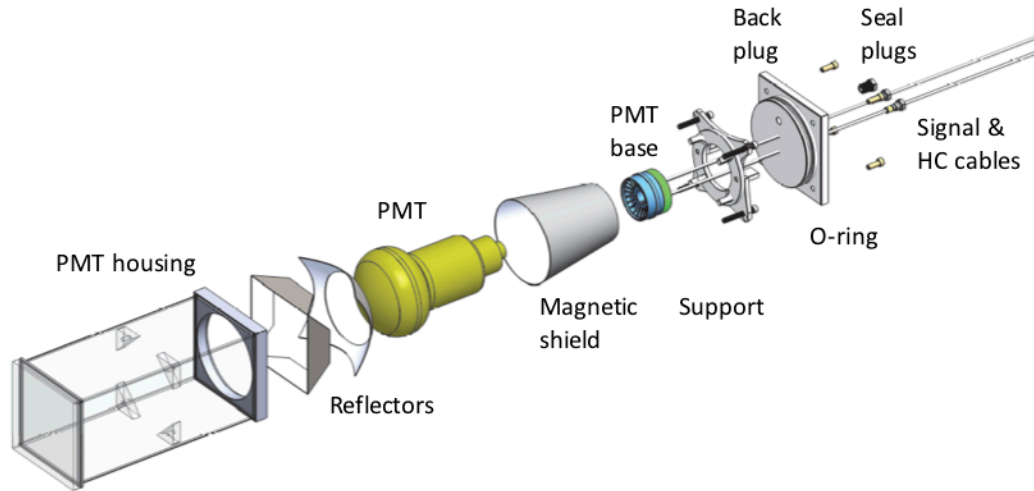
Schematic of PMT optical module assembly sequence. Starting with a cleaned acrylic enclosure that has passed QC inspection, reflectors are glued to the front side walls, the conical reflector is squeezed through the back opening and pushed against the front window. The PMT and magnetic shield are pushed against the conical reflector and secured in place with an acrylic support. A back plug assembly is made by threading the cables through the seal plugs and soldering to the PMT base. The base is pushed onto the PMT pins, seal screw plugs are tightened around the cables and temporary screws secure the plug to the back of the housing [108].
